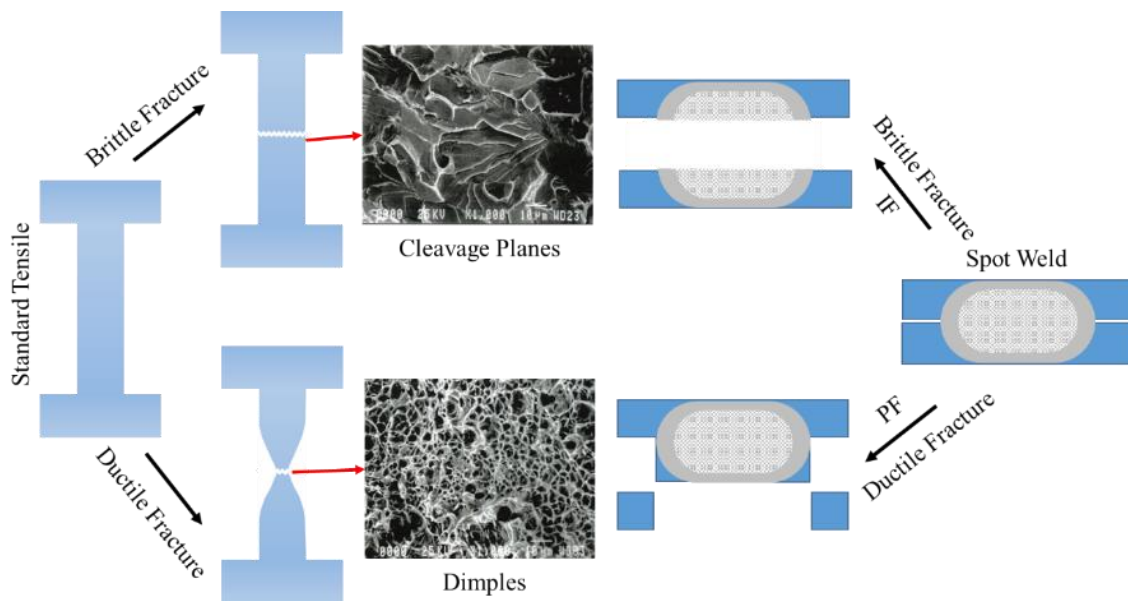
Different types of fracture in standard tensile samples and spot welds with respect to the identified failure modes in bulk metals (Fractographs adopted from [90]).
